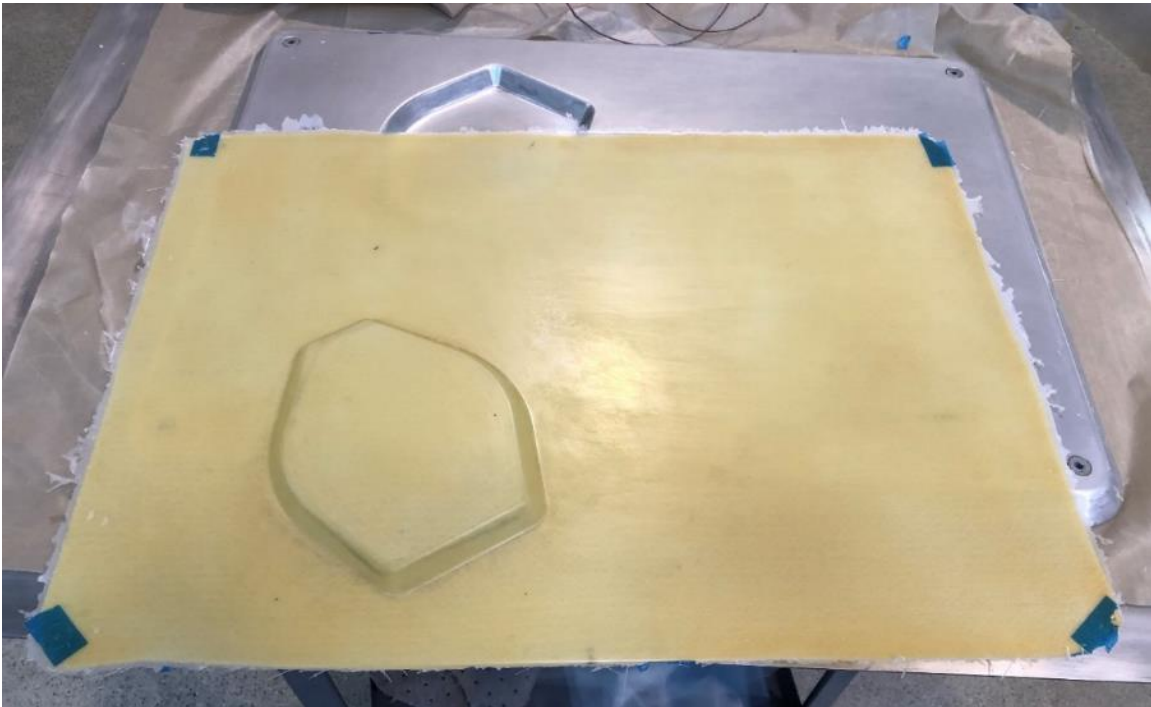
Snap Cure Door Panel Molded using Autoclave on top of Machined Tool
